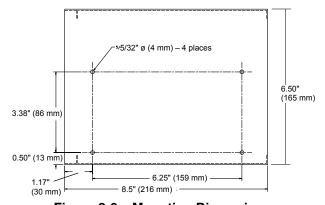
Mounting Dimensions – Remote Current Control Console
